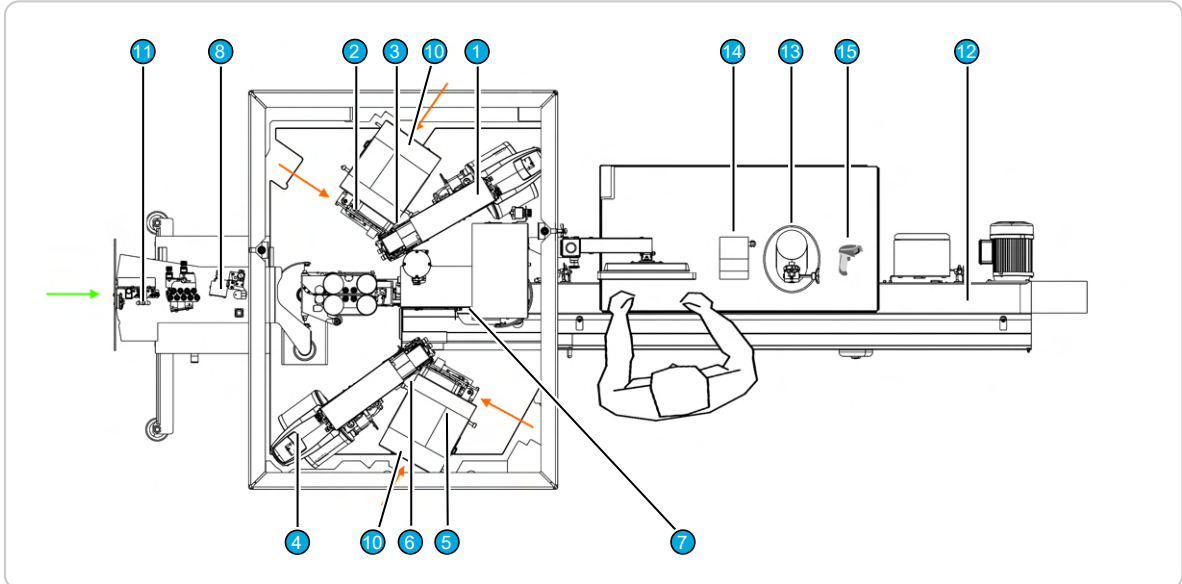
CrimpCenter 36 S - Sample Configuration - Crimp and Seal - Quality Assurance
